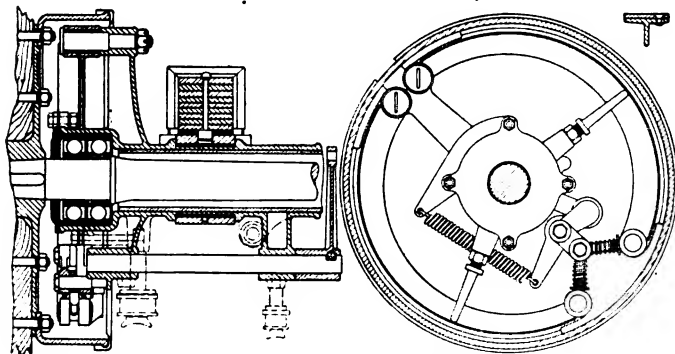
REAR-WHEEL BRAKE EMPLOYED ON THE BENZ CAR
